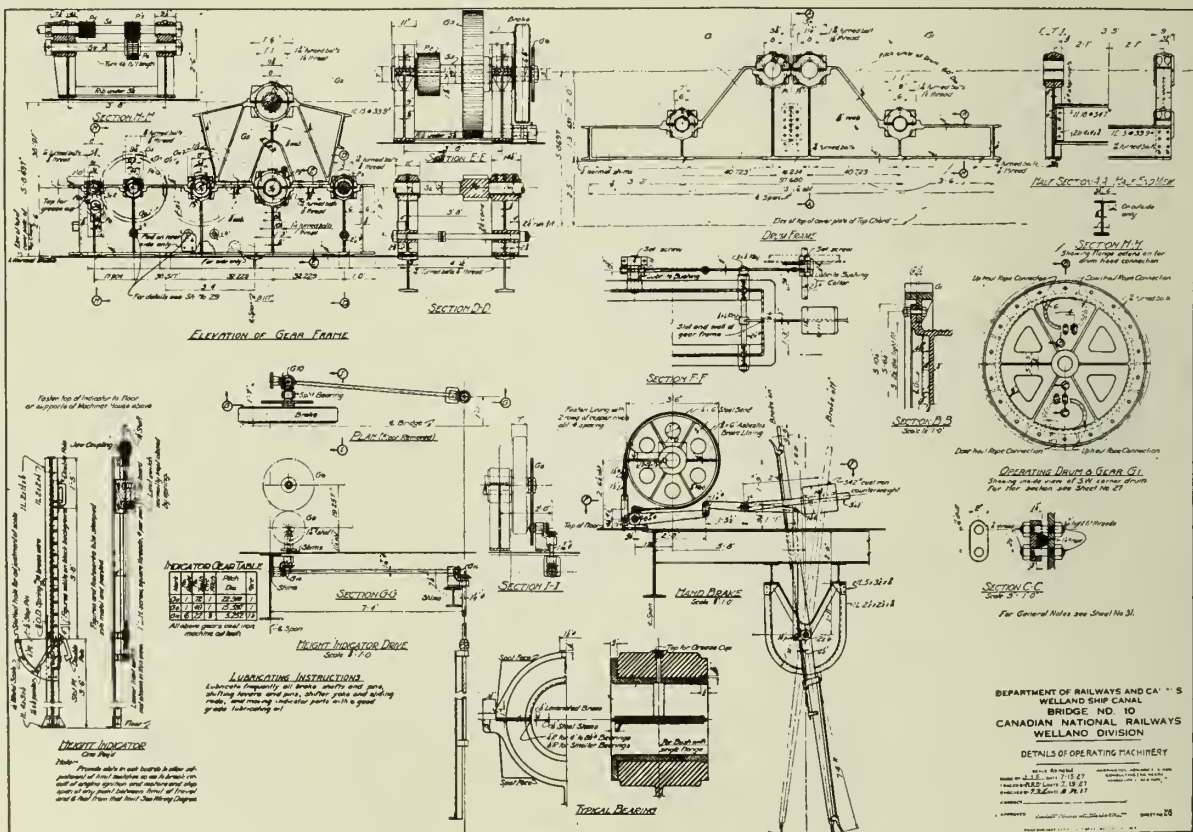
Bridge No. 10—Details of Operating Machinery.
